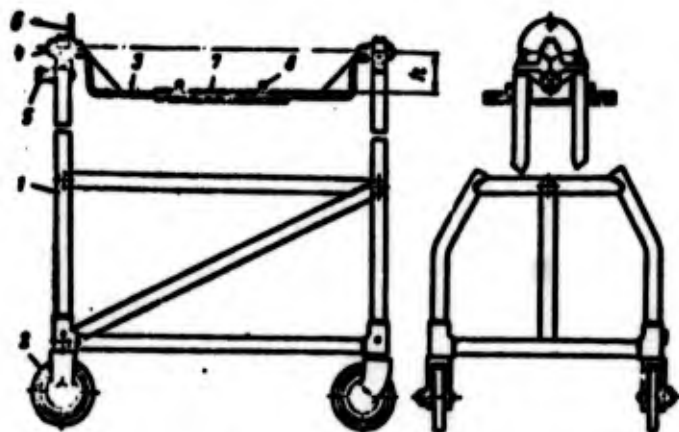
Railless cart for assembly and movement of units: 1 - frame; 2 - wheel; 3 - cradle; 4 - journal of cradle; 5 - stop; 6 - disk of stop; 7 - bearing surface; 8 - adjusting pin.
